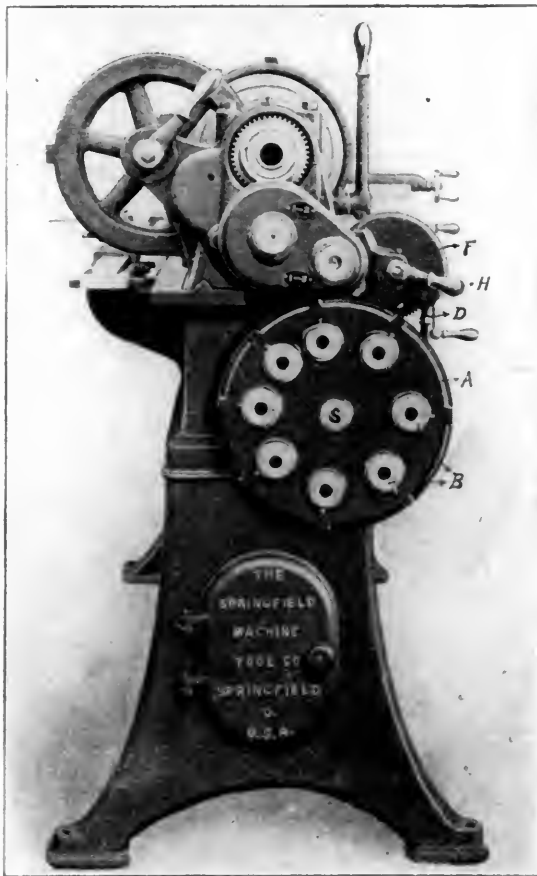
END VIEW OF IDEAL LATHE SHOWING METHOD OF SUPPORTING CHANGE GEARS BY THEIR HUBS.
